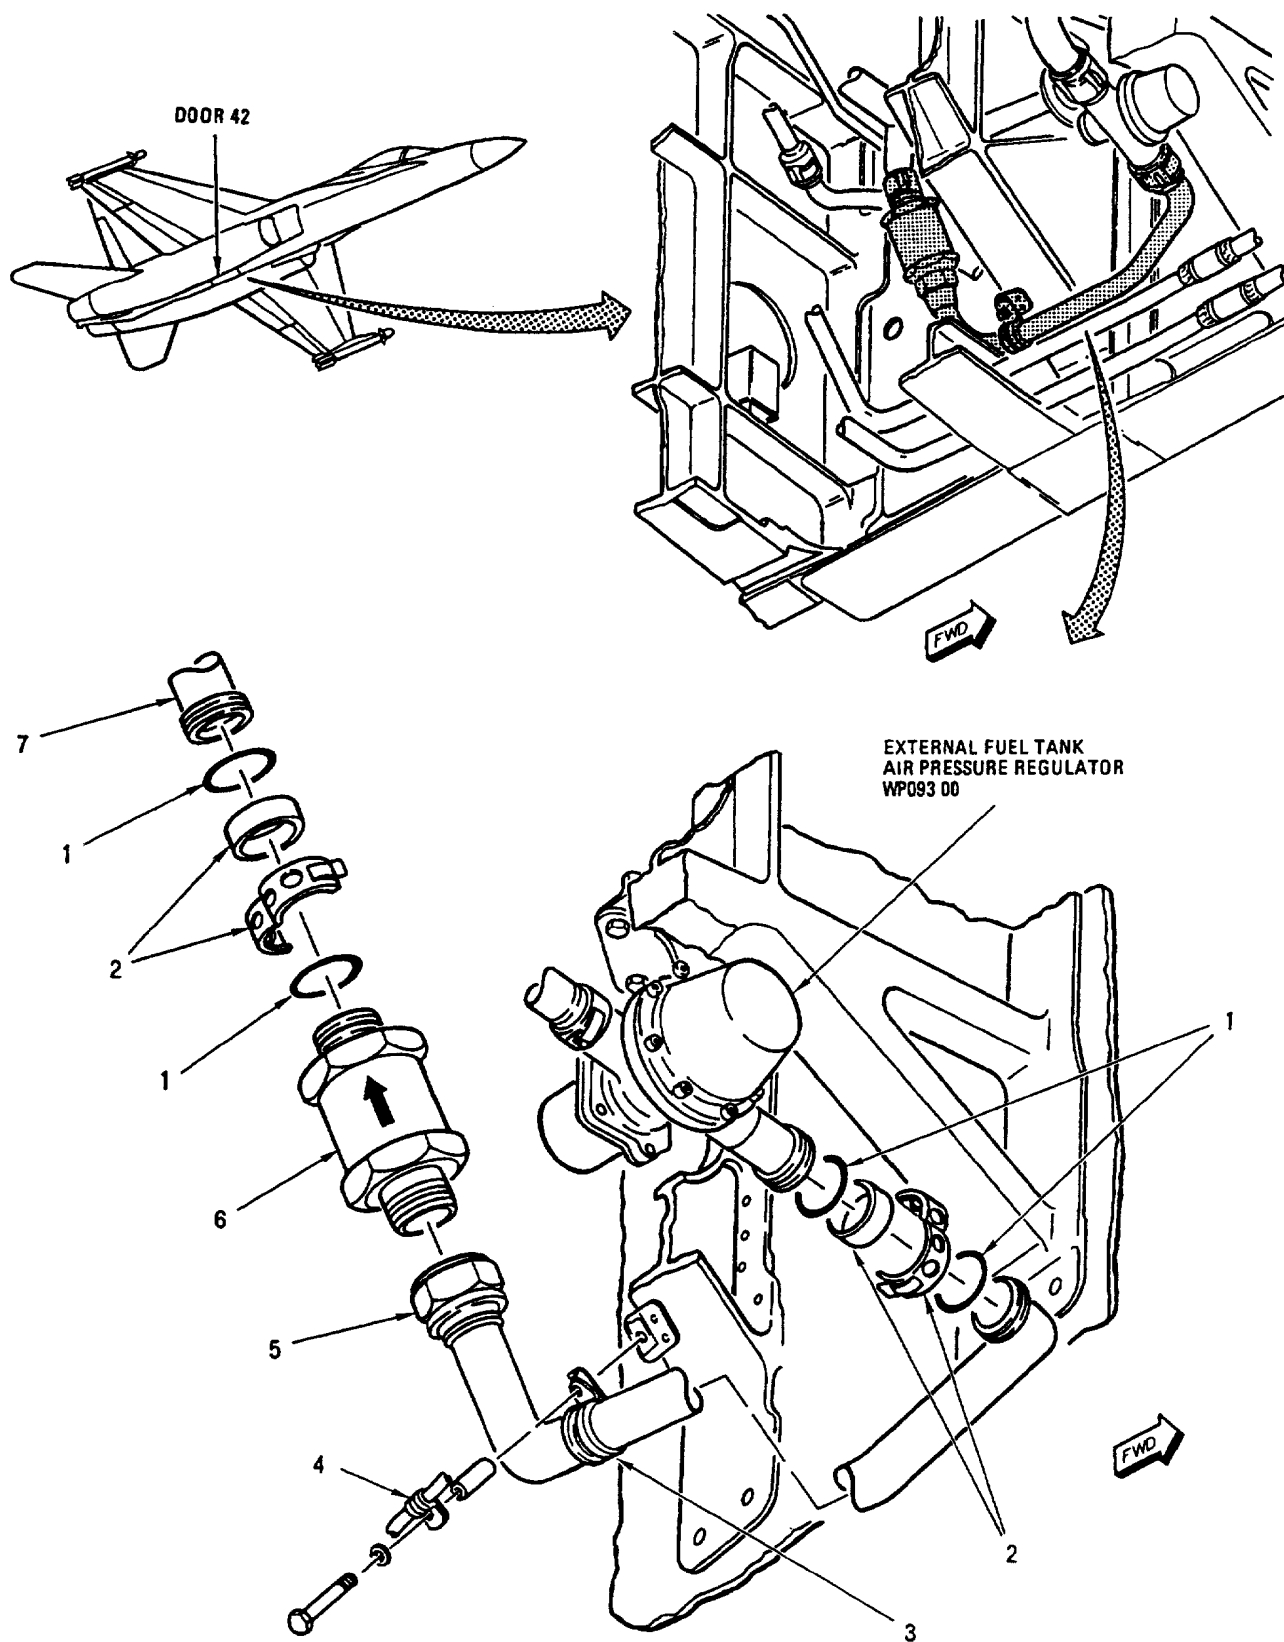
External Fuel Tank Air Pressure Regulator Check Valve (5VAR620) - 161353
